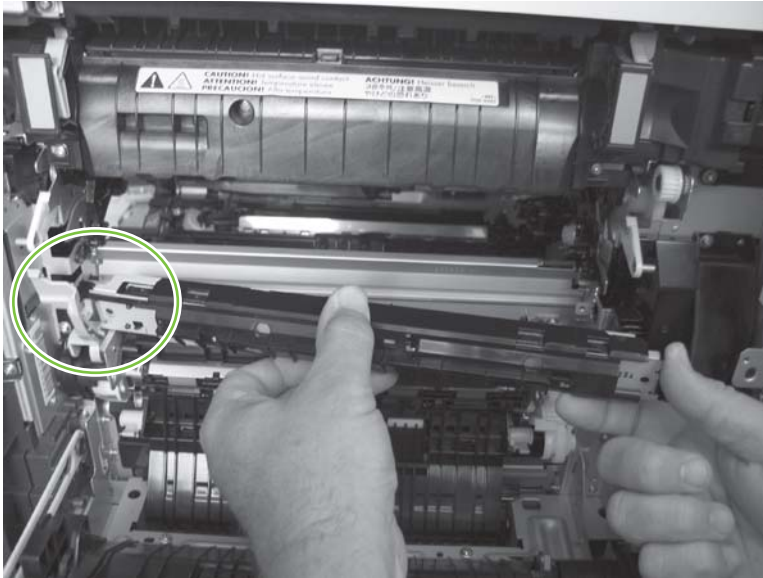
Remove the RD sensor assembly (2 of 6)
